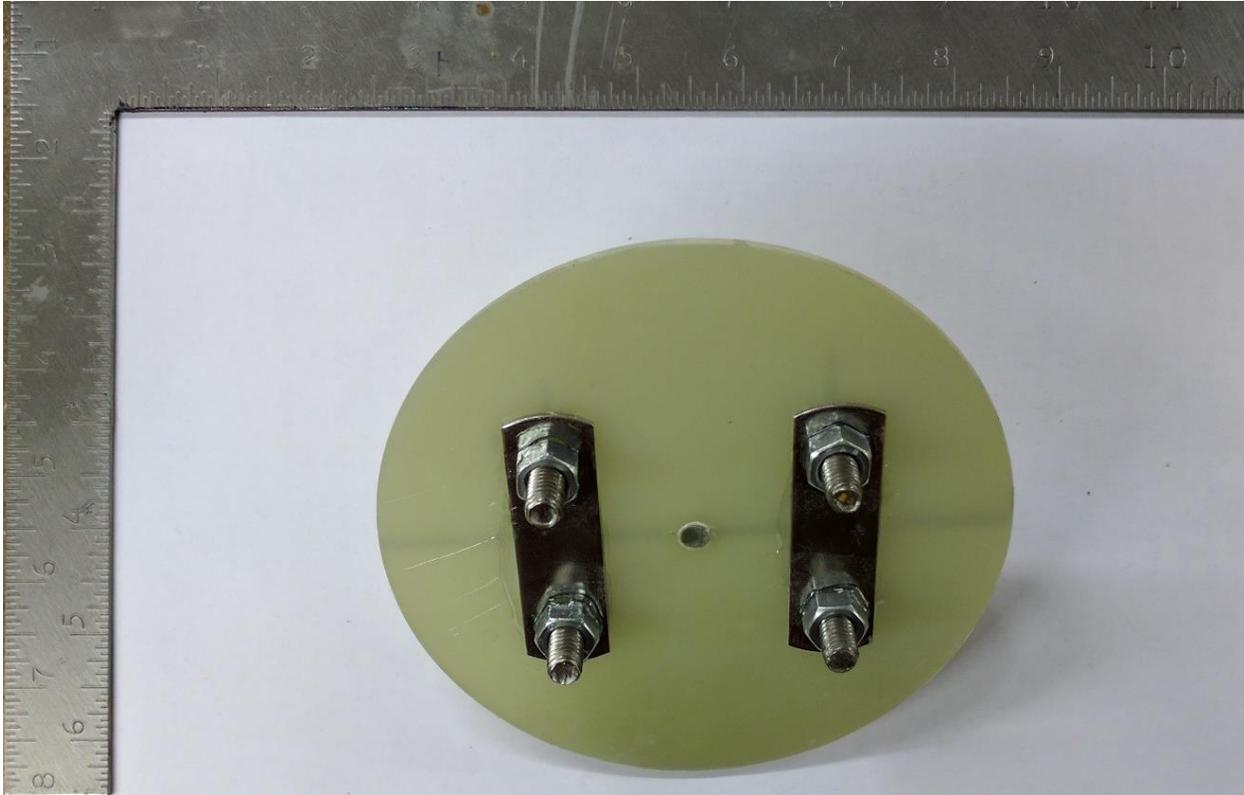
Upper Bulkhead with U-bolts Bottom
